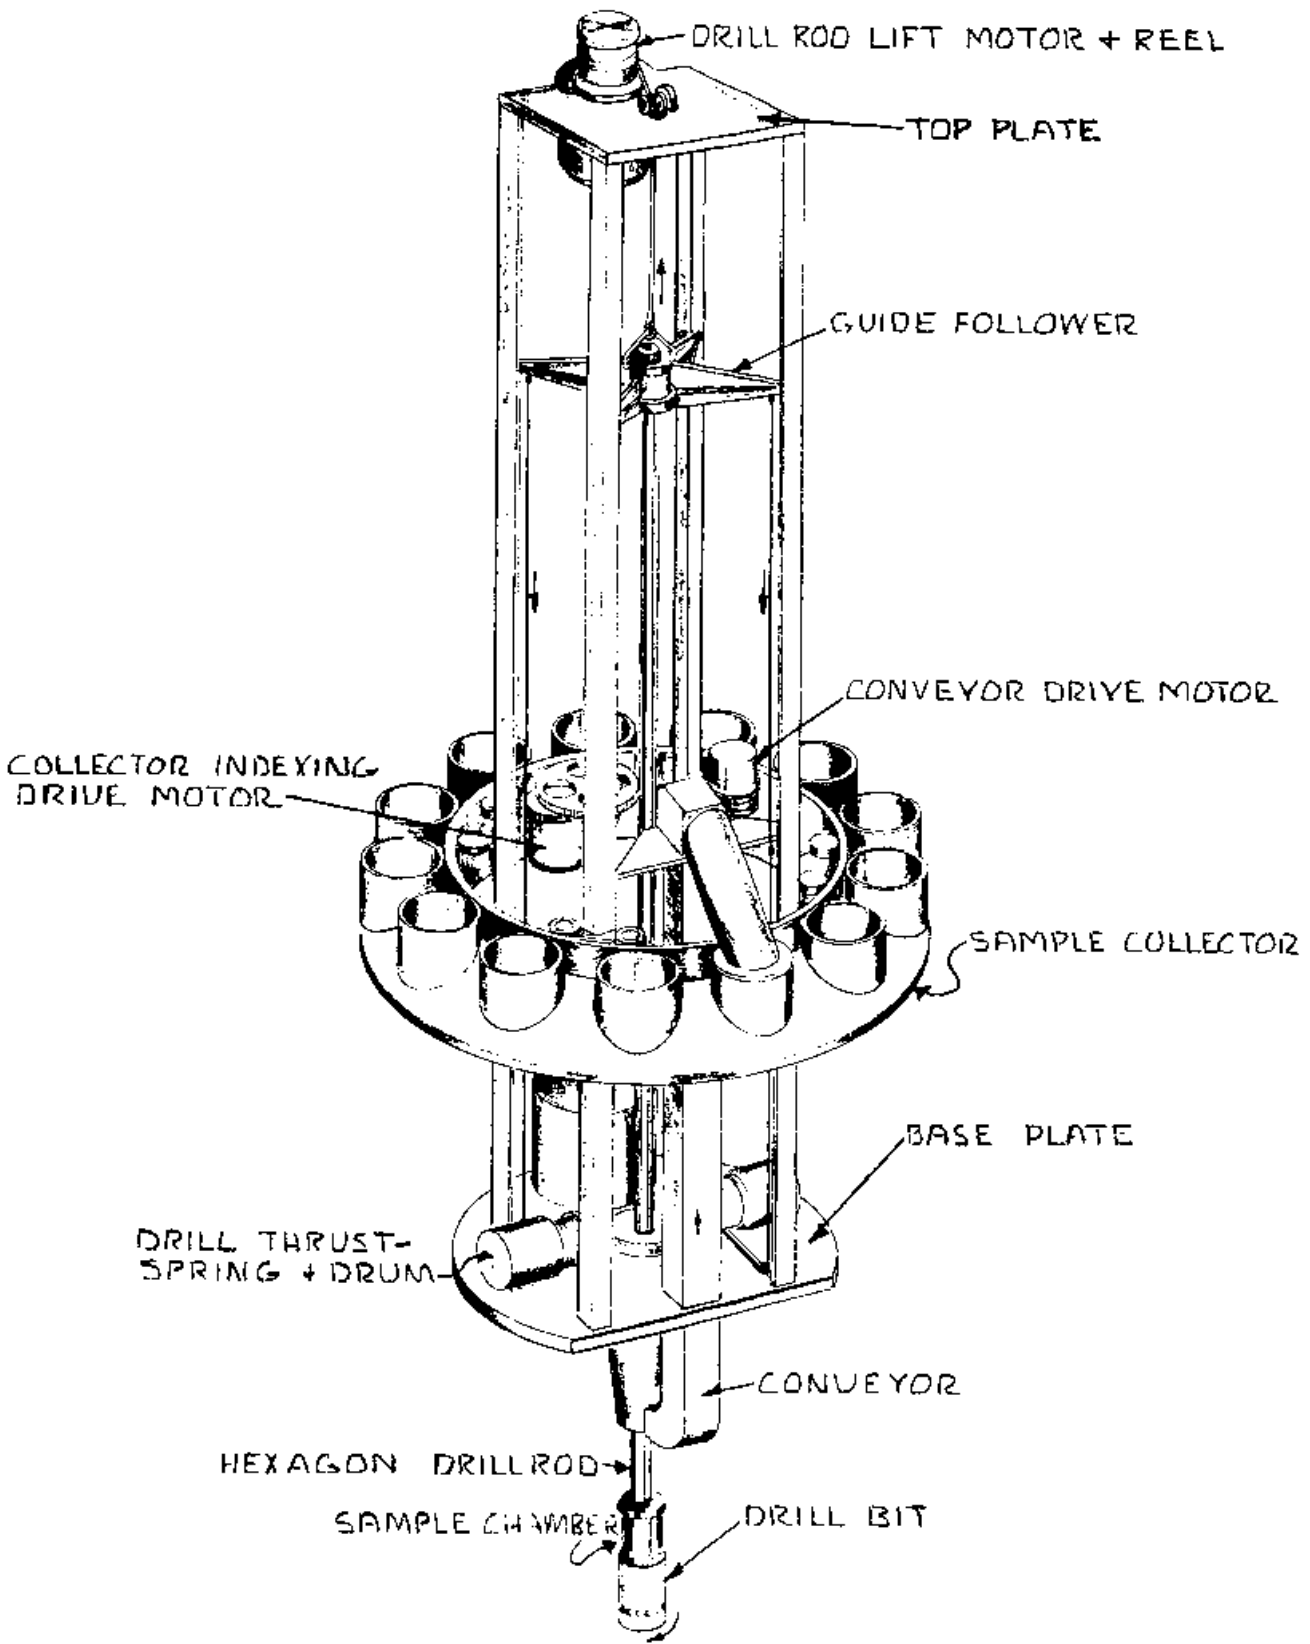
DRILL UNIT COMPONENT ARRANGMENT
